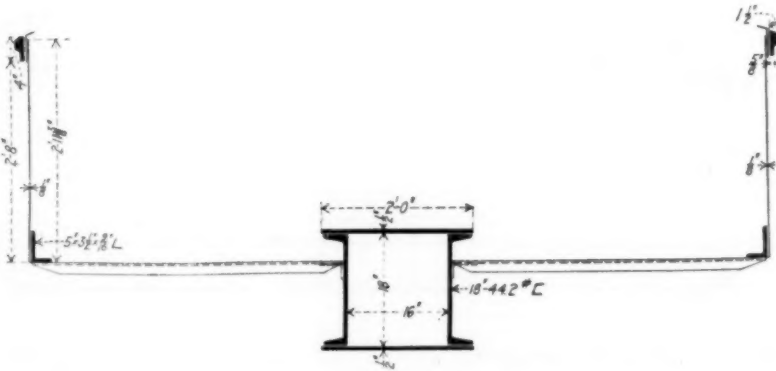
TYPE *b*: WHOLE WEIGHT CARRIED ON CENTER SILLS
